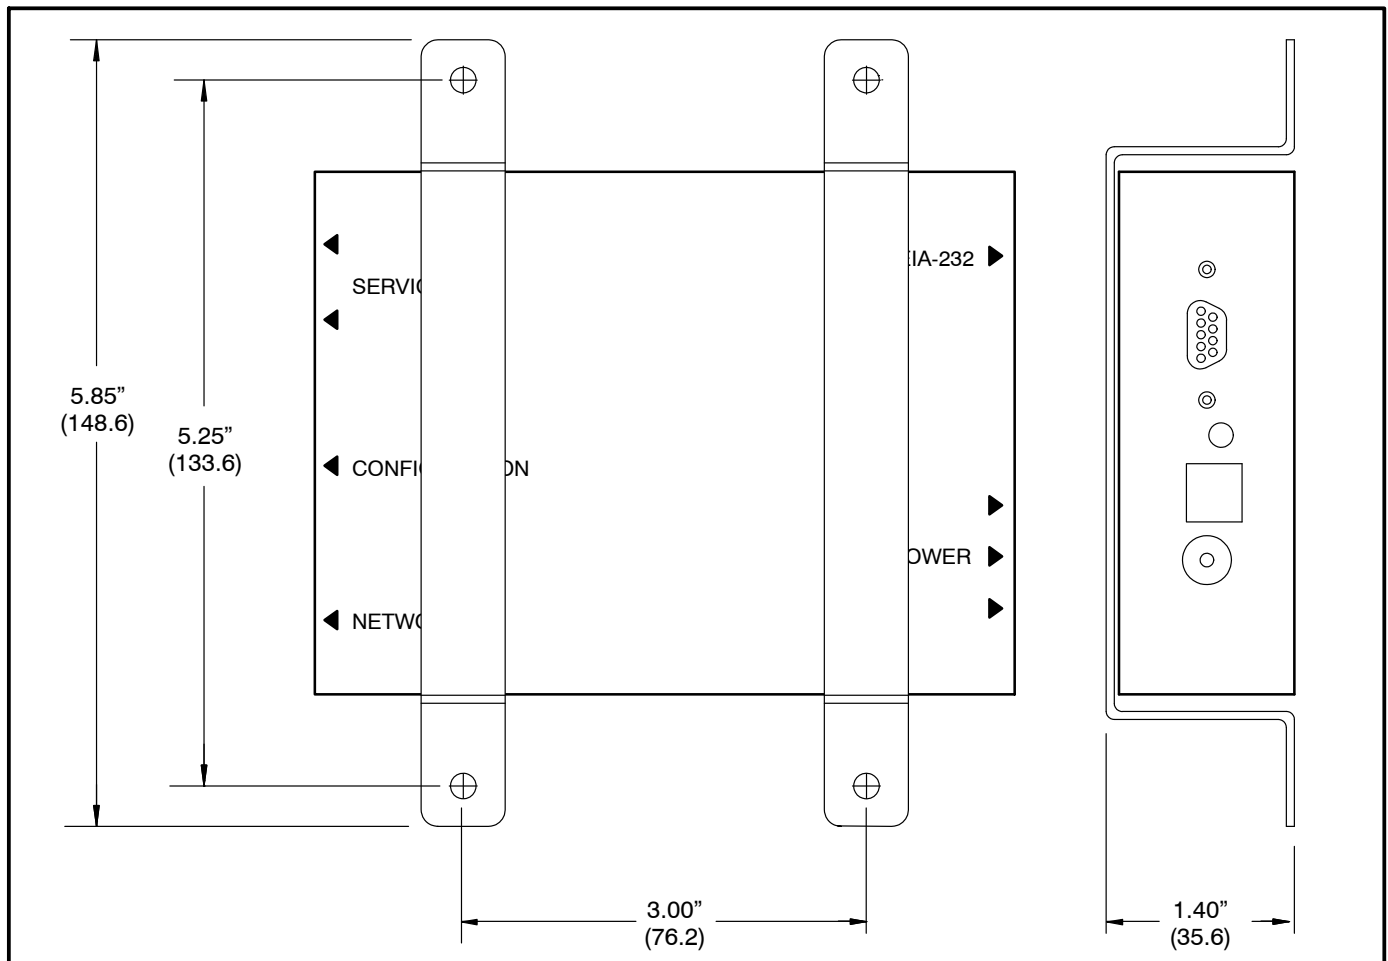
MOUNTING BRACKET HOLE LOCATIONS
